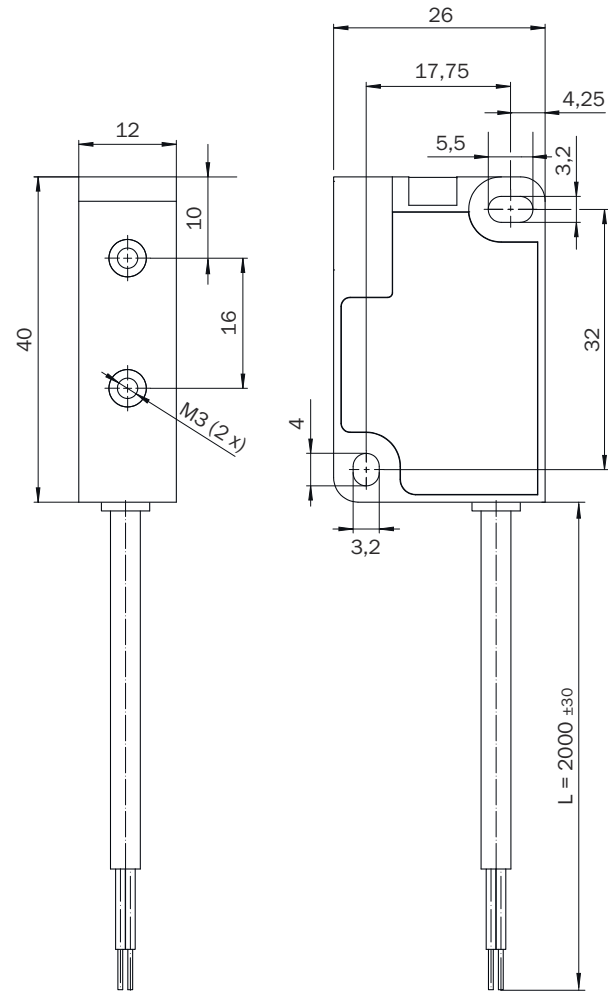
IQB2S12-\*\*-B\*\*W2 dimensional drawing
